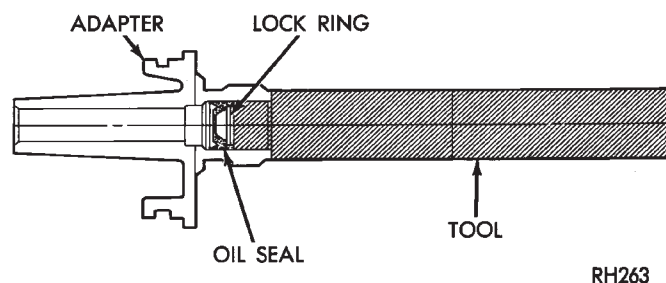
Installing Speedometer Adapter Seal (With Two-Piece Sensor And Metal Adapter)
